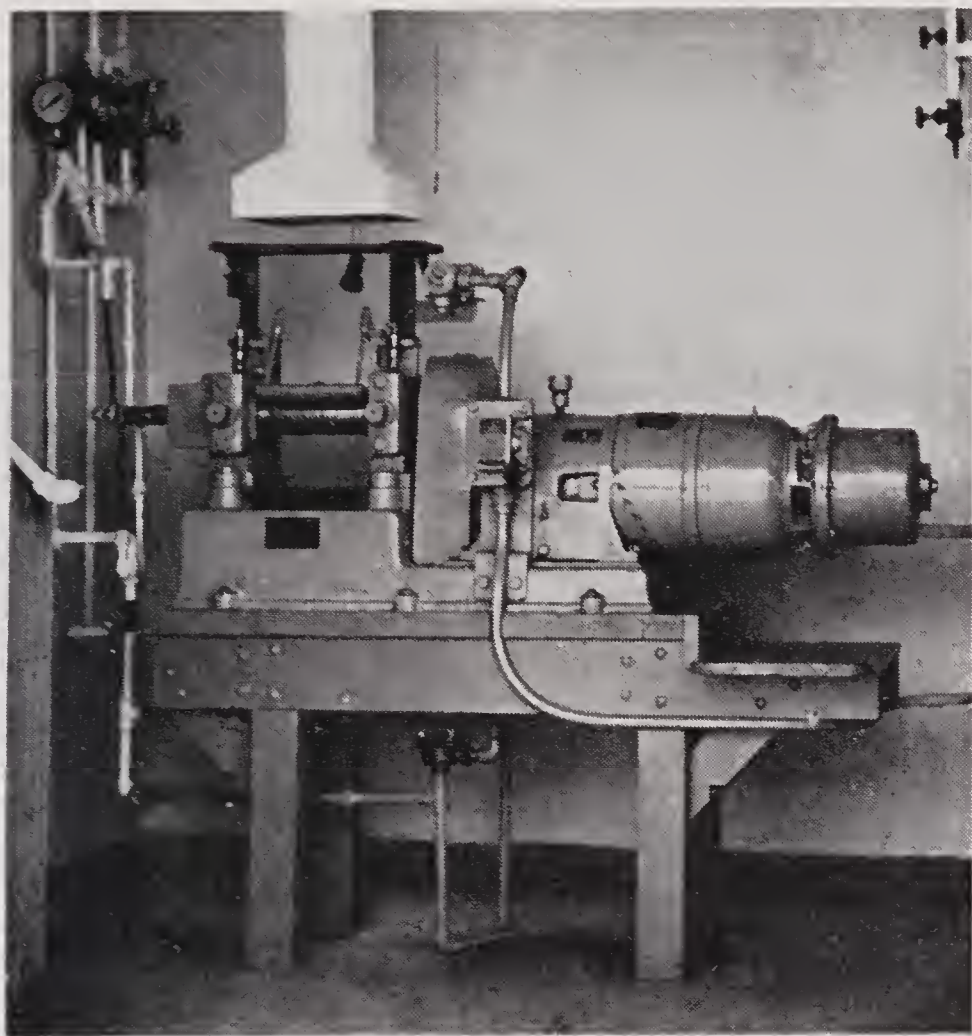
Powder-rolling mill, complete with explosion-proof motor and magnetic brake.
